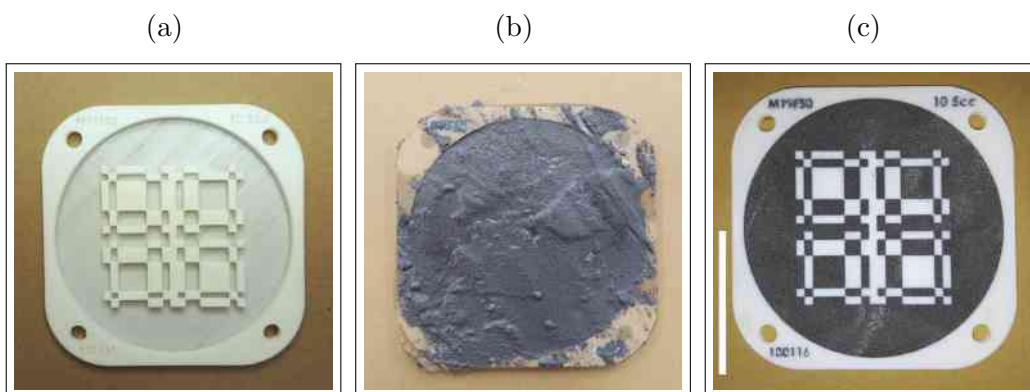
Cold Casting Process: (a) the 3D printed PLA CM mould is (b) filled with the TEC and then cured. (c) reveals the final CM after polishing has occurred.
